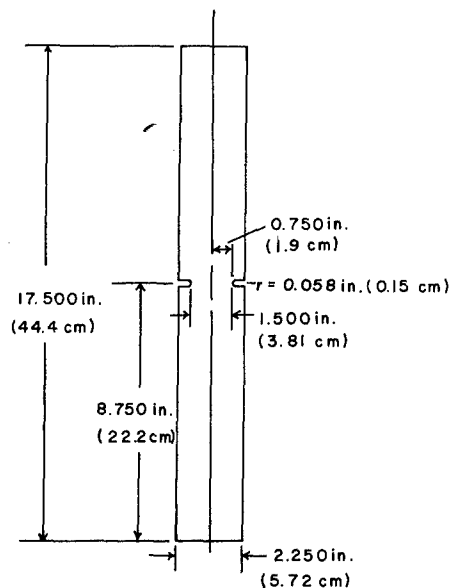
Specimen configuration with edge notches made of 0.090-inch-thick (2.3 mm) 7075-T6 aluminum-alloy sheet. $K_t = 4.0$.
